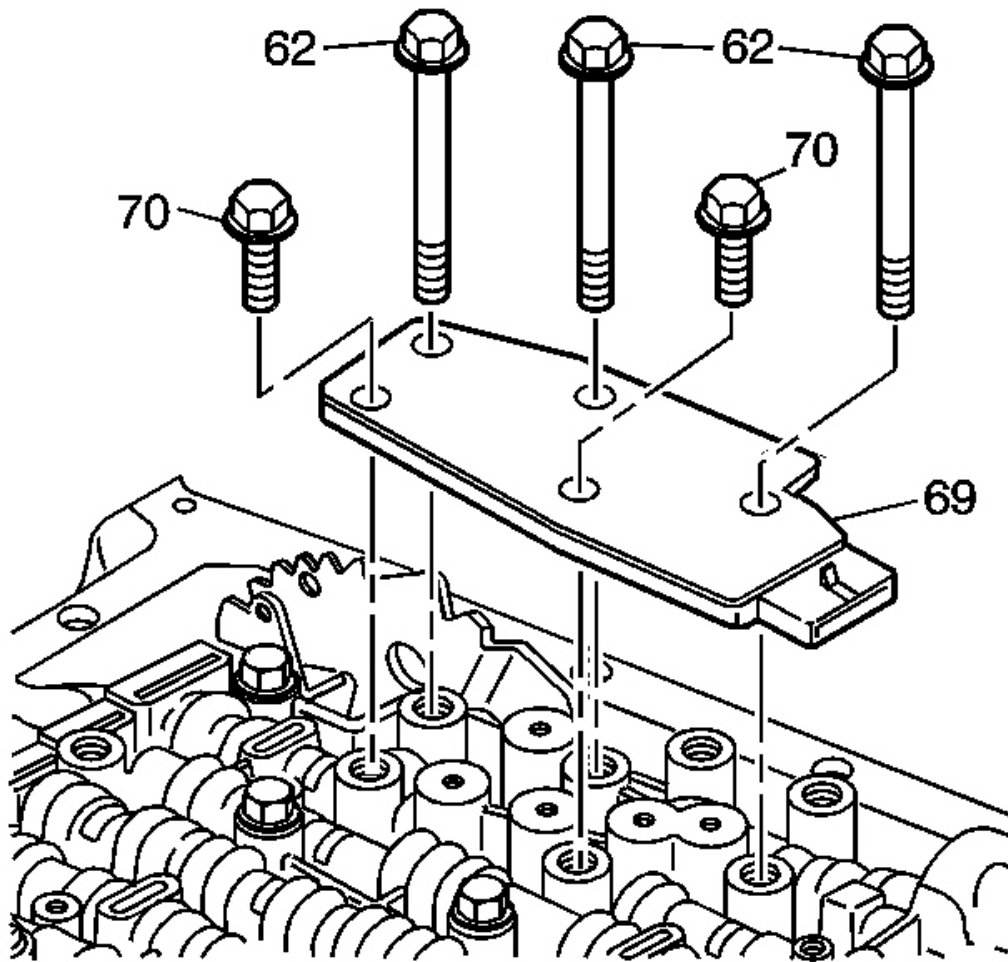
TFP Manual Valve Position Switch Retaining Bolts
